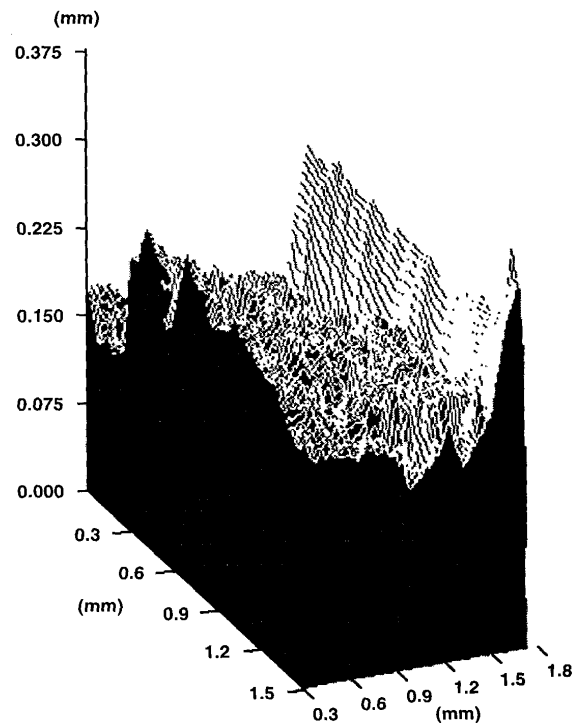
Scanned image of fracture surface of test piece.
